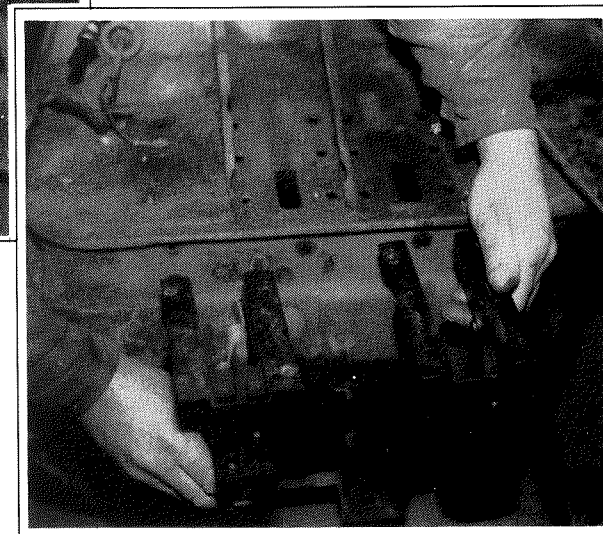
To remove the brake and clutch pedal mechanisms, undo the bolts on the front of the bulkhead and behind where you removed the master cylinder brackets. As you remove the last bolt, you should hear a loud clunk. This is the pedal mechanism hitting the floor inside the car!
